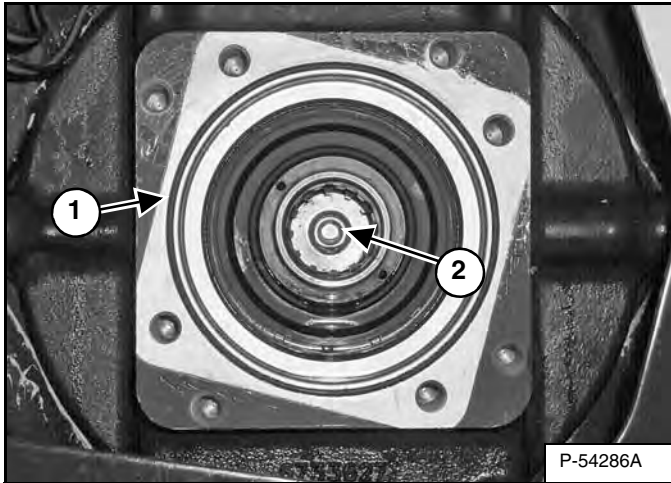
shows the motor carrier seal correctly installed.
